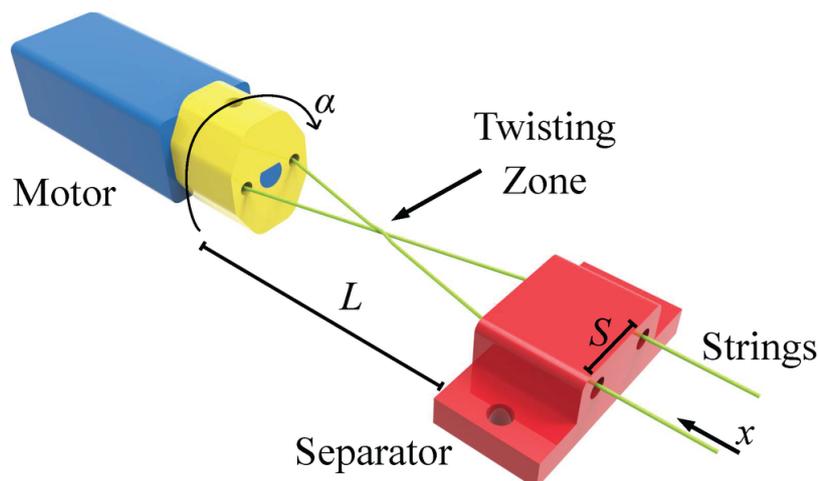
Twisted string system. With an electric motor (blue), strings (green), connection between motor shaft and strings (yellow) and separator (red). Where L is twisting zone length, α is the rotational angle of the motor shaft, x is the linear displacement of the strings and S is the distance between the holes of the separator.
